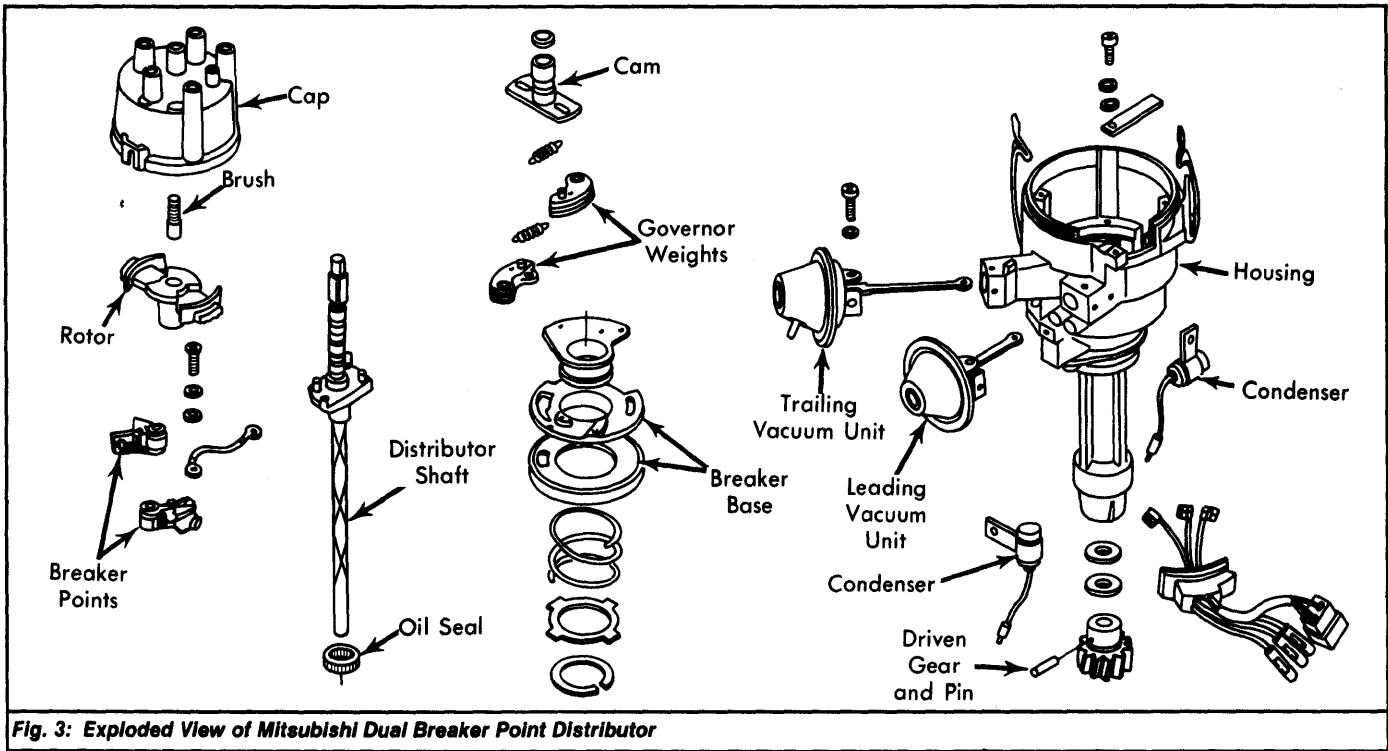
Exploded View of Mitsubishi Dual Breaker Point Distributor
